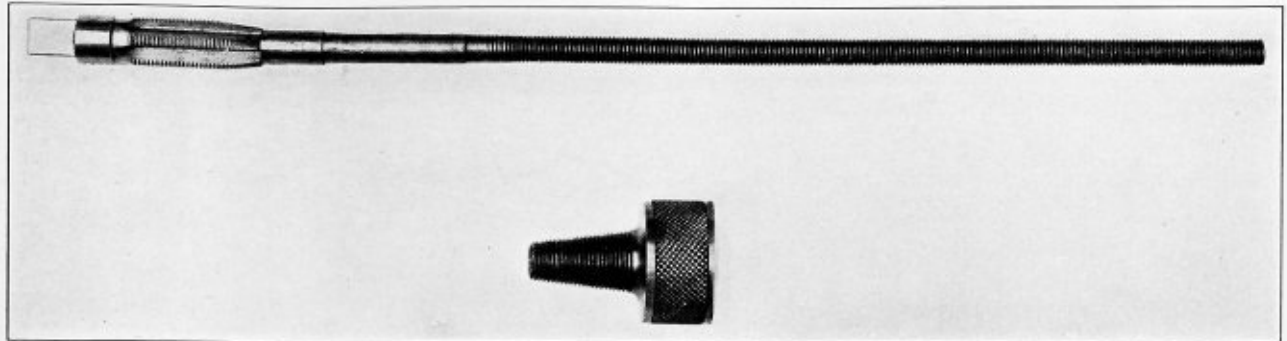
Staybolt Tap with Threaded Spindle and Adjustable Nut
